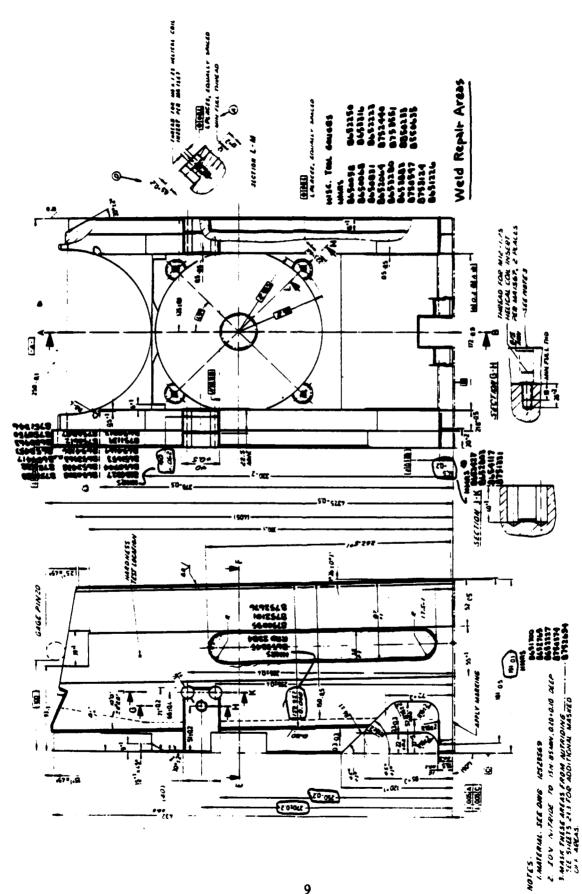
Location of nonconformances that resulted in weld repair development.
